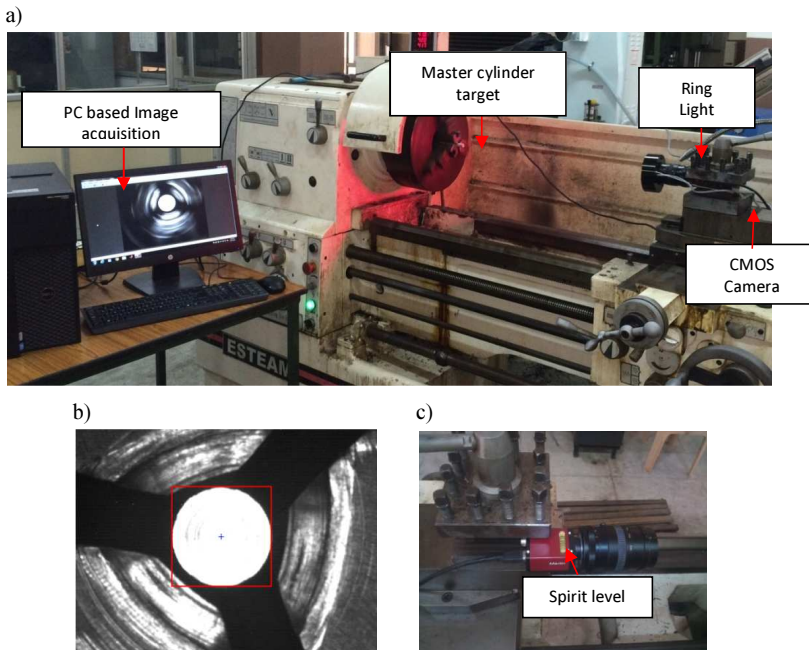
The experimental arrangement for spindle radial error measurement using the vision system in a lathe. Important elements of the machine vision system for spindle radial error measurement (a); an image of the master cylinder (b); verification of alignment of the camera using a spirit level.
